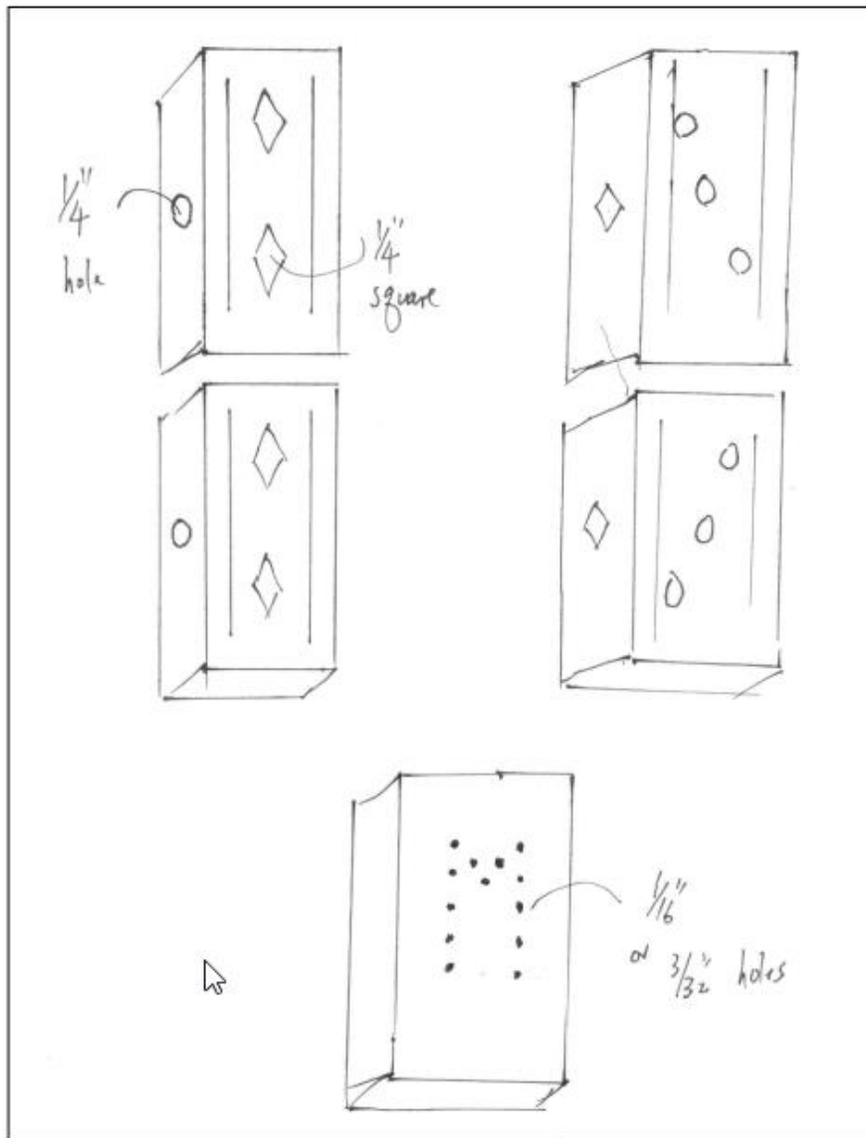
Sketch out your inlay designs to help visualize the patterns.
